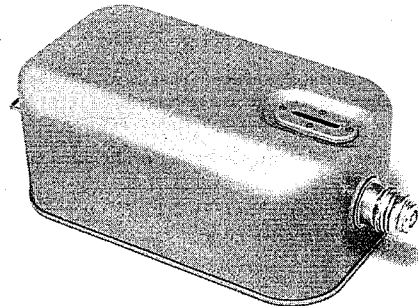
Detachable kerosene tank of oil heater (an example of press forming product of the lubricative sheets)
